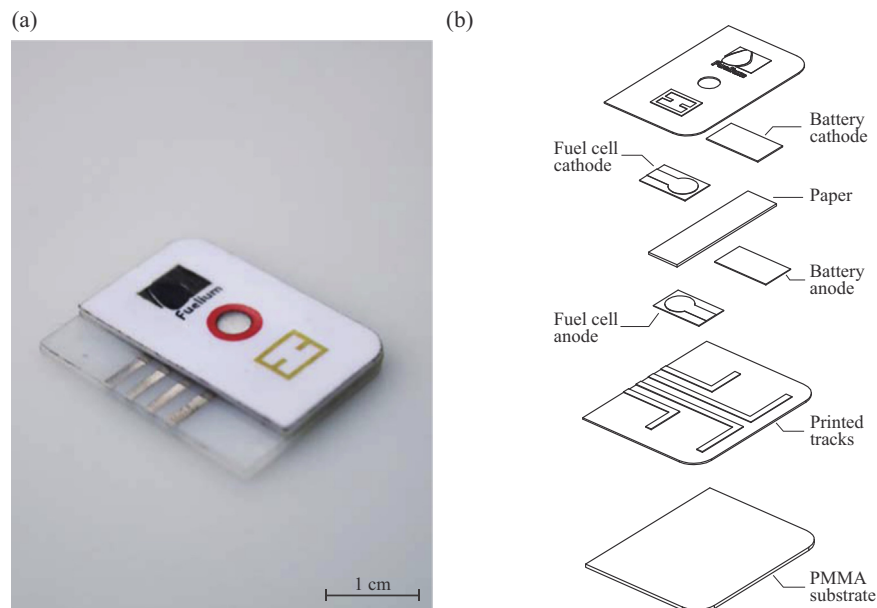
a) Picture of paper-based test strip. b) Exploded view of its main components.
